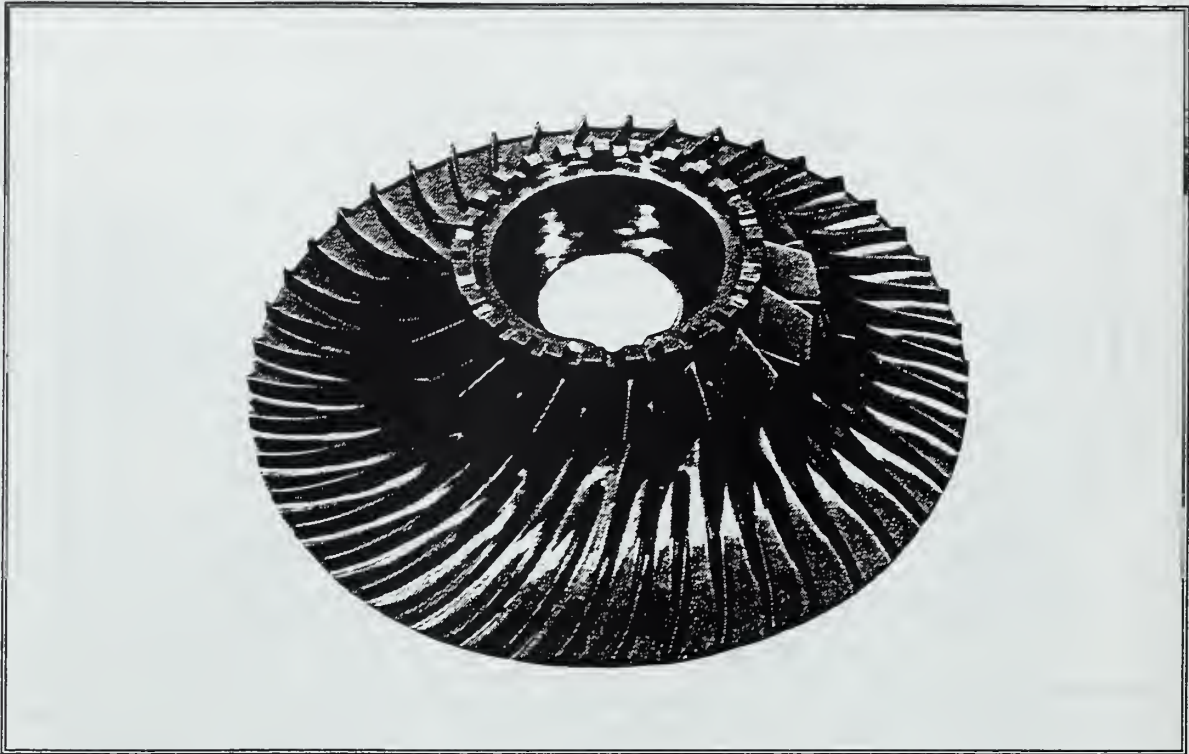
Centrifugal Compressor Impeller with Splitter Blades.
